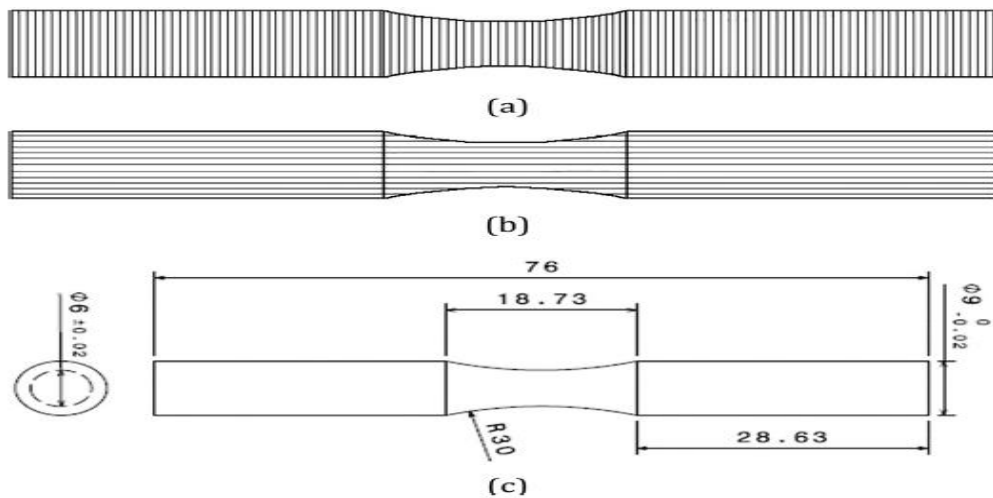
CAD design of ABS sample: (a) vertical and (b) horizontal print direction, (c) geometry of the fatigue sample
